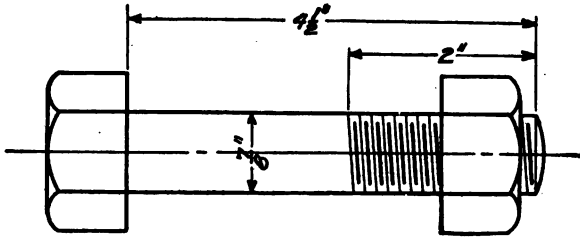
Conventional Drawing for Machine Bolt and Nut
